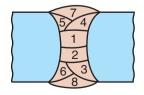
A deep weld showing the buildup sequence of eight individual weld beads.
